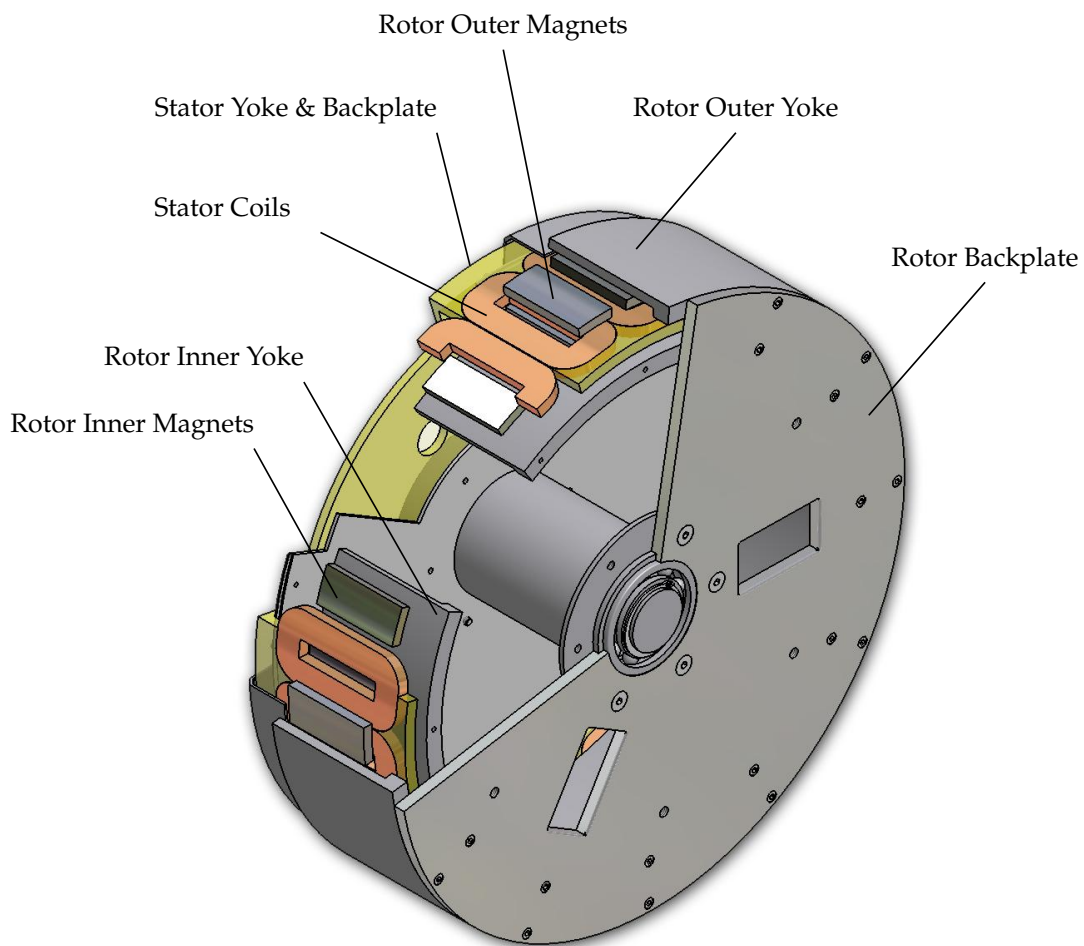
A 3-D view of a 16 pole RFAPM machine with non-overlapping windings, Stegmann [15].
